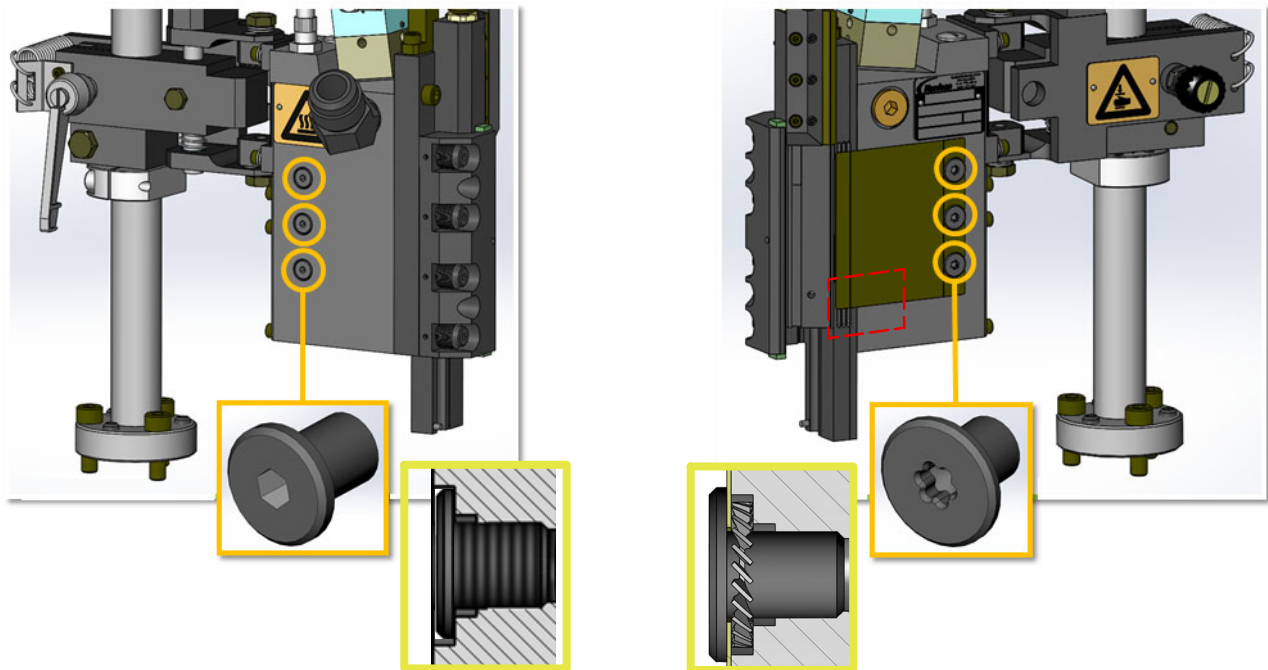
Use screws with the biggest possible head diameter to secure the sliding plate
